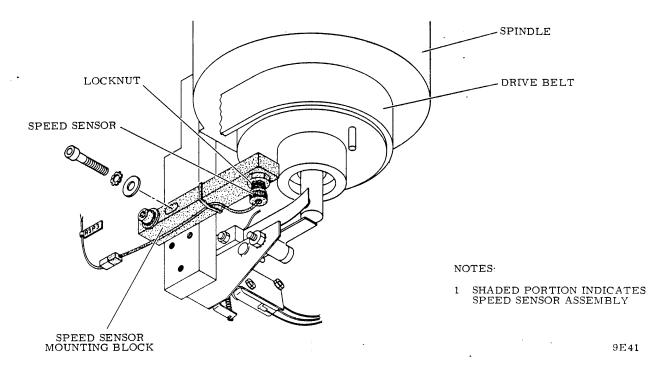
Speed Sensor Assembly Replacement (S/C 08 and Below)
